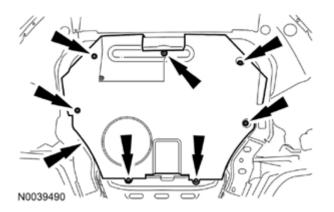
Locating Underbody Cover And Screws Courtesy of FORD MOTOR CO.
